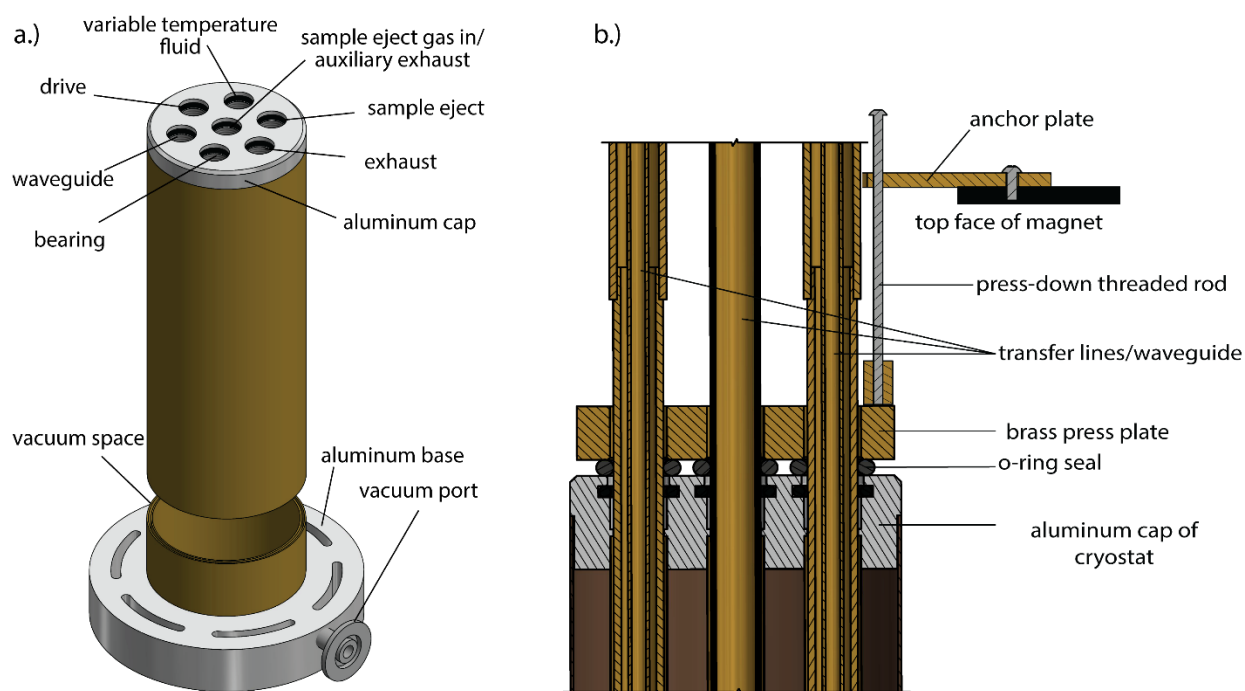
a.) A CAD drawing of the cryostat. b.) An expansion of the CAD drawing in (a) around the top of the cryostat, with the transfer lines and their supporting infrastructure shown. This figure was reproduced with modification from Scott, F. J.; Alaniva, N.; Golota, N. C.; Sesti, E. L.; Saliba, E. P.; Price, L. E.; Albert, B. J.; Chen, P.; Connor, R. D. O.; Barnes, A. B. A Versatile Custom Cryostat for Dynamic Nuclear Polarization Supports Multiple Cryogenic Magic Angle Spinning Transmission Line Probes. *J. Magn. Reson.* 2018, 297, 23–32³³.
